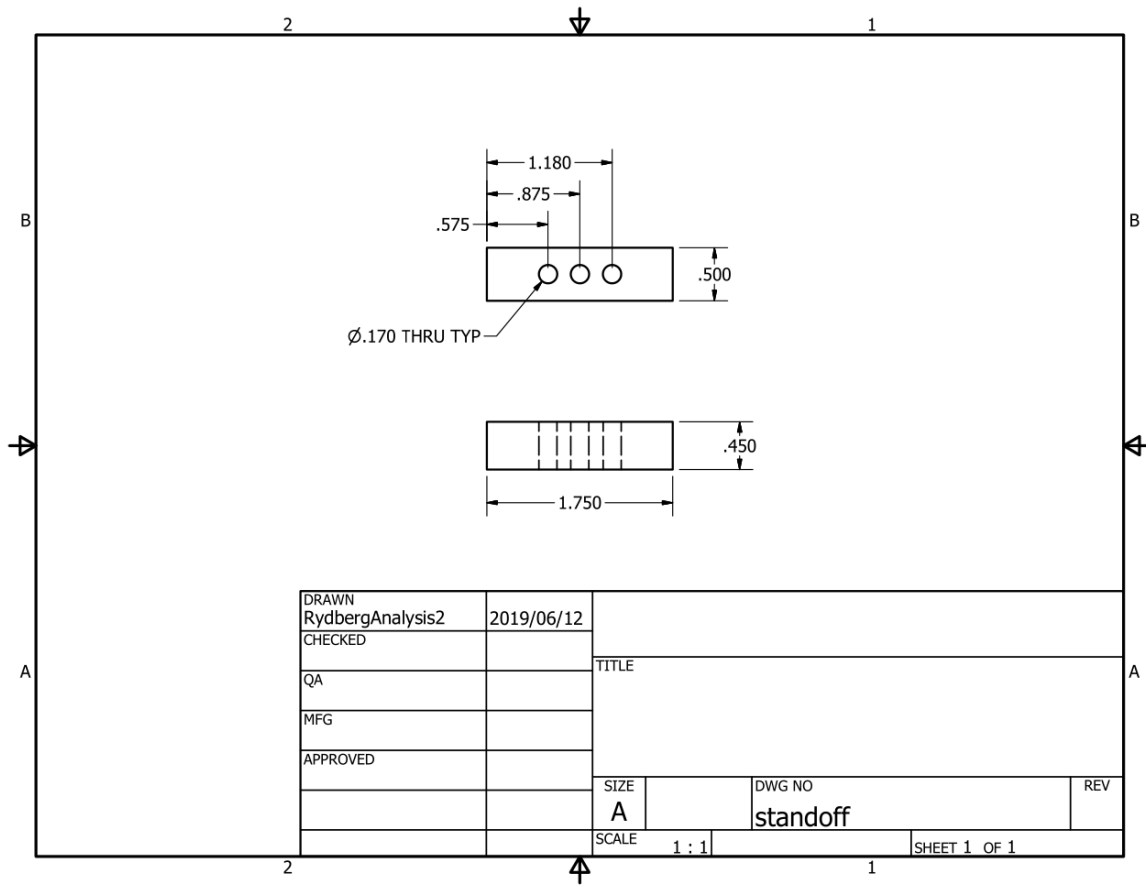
Mechanical drawing of the standoffs that support the optical cage for the second sheet trap assembly.
